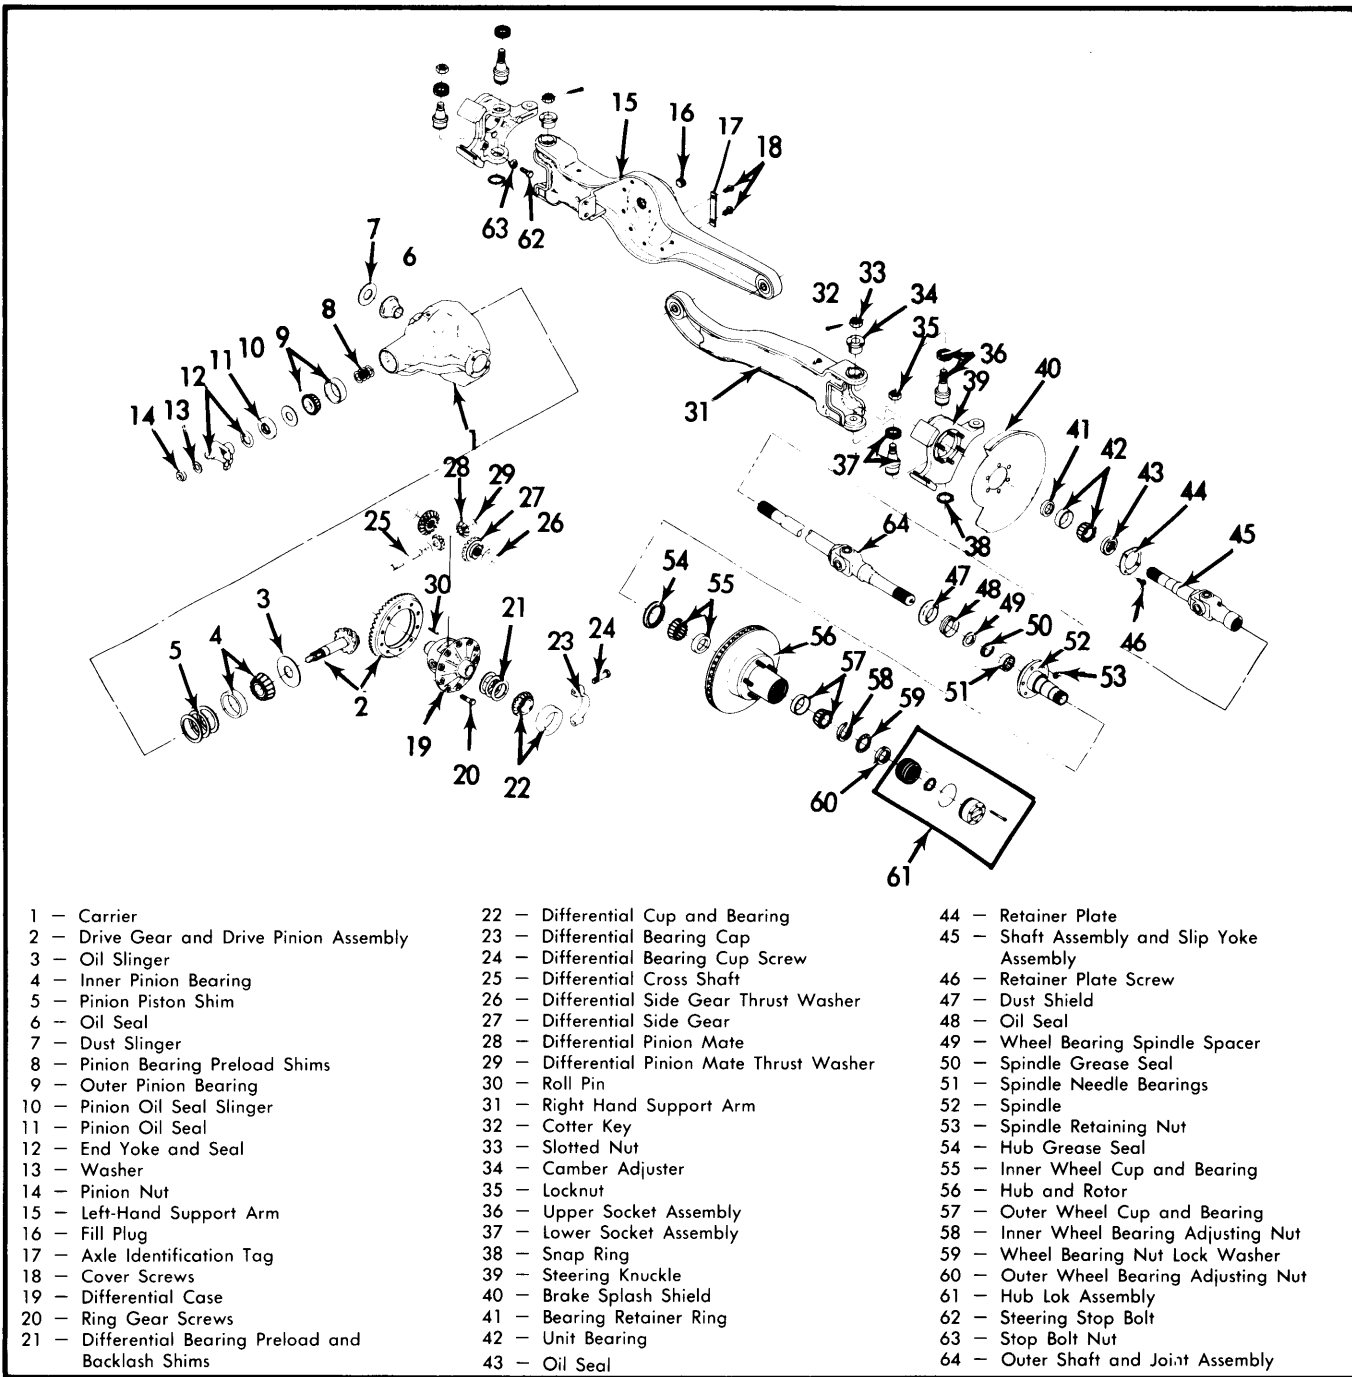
Exploded View of Spicer (Dana) Model 44-IFS Front Drive Axle
